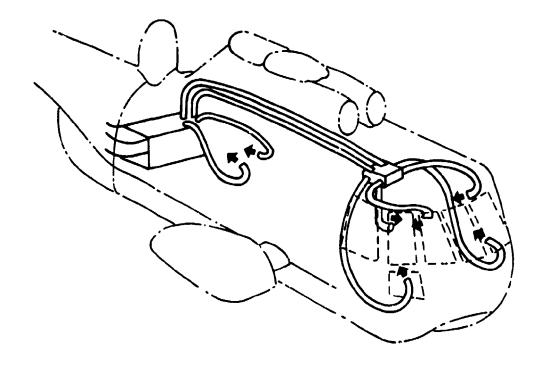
DUCTING LAYOUT FOR COOLING AIR
